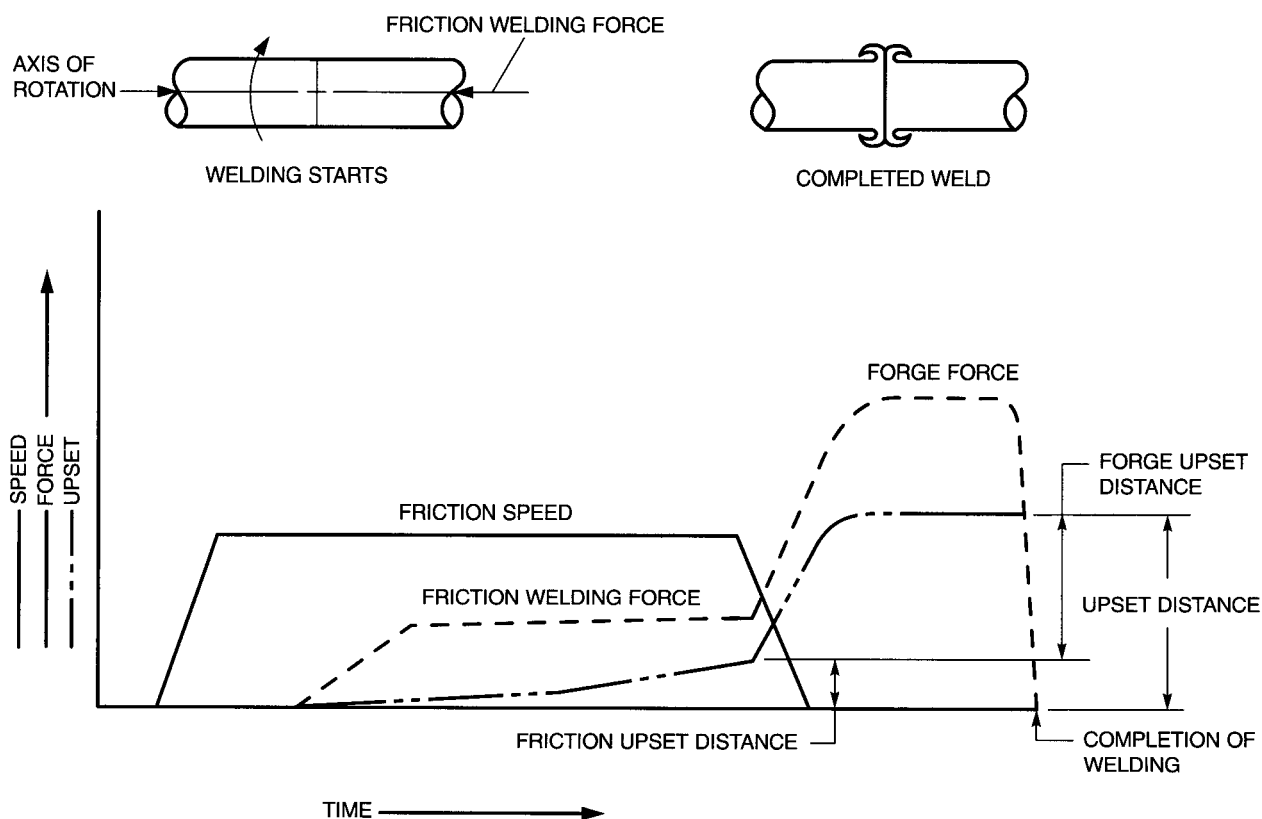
Generalized Diagram of Direct Drive Friction Welding
